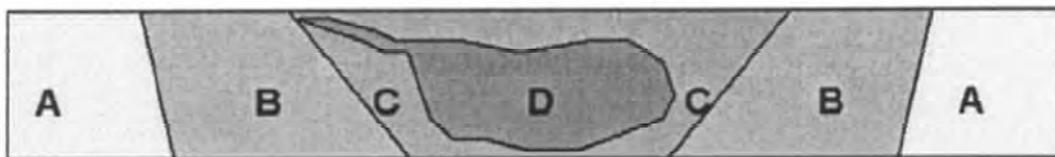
schematic of a typical FSW cross-section (A) Parent Material; (B) Heat Affected Zone; (C) Thermal Mechanically Affected Zone; (D) Weld Nugget. /Sci07/
